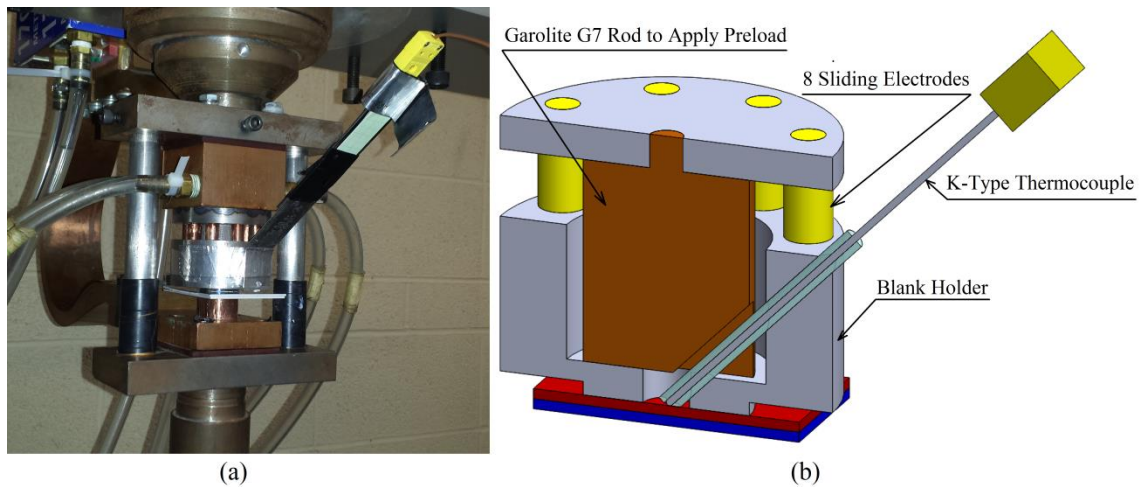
Modified tooling for temperature measurement, (a) tooling and thermocouple installation on the machine (b) a drawing of cut section through the tool set.
